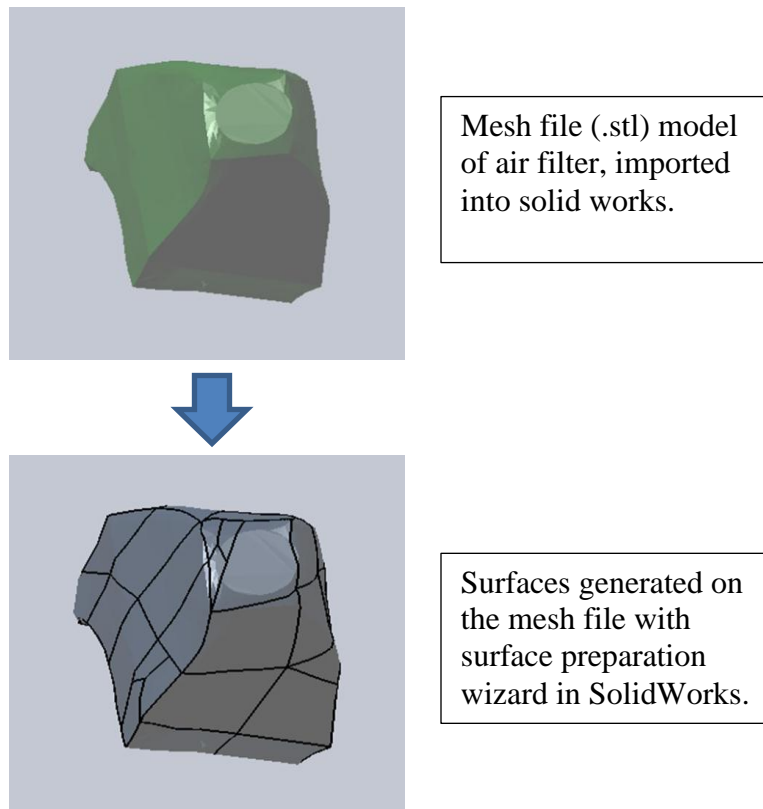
Sequence in which the Solid Model is built using Scanto3D tool.
